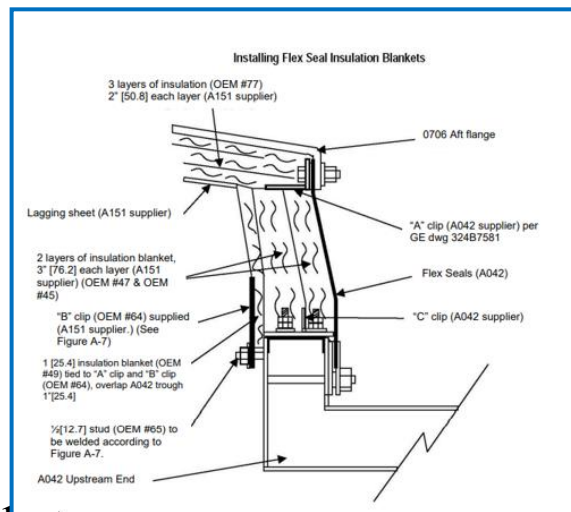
(a) Insulation arrangement (refer MLI 0816)
